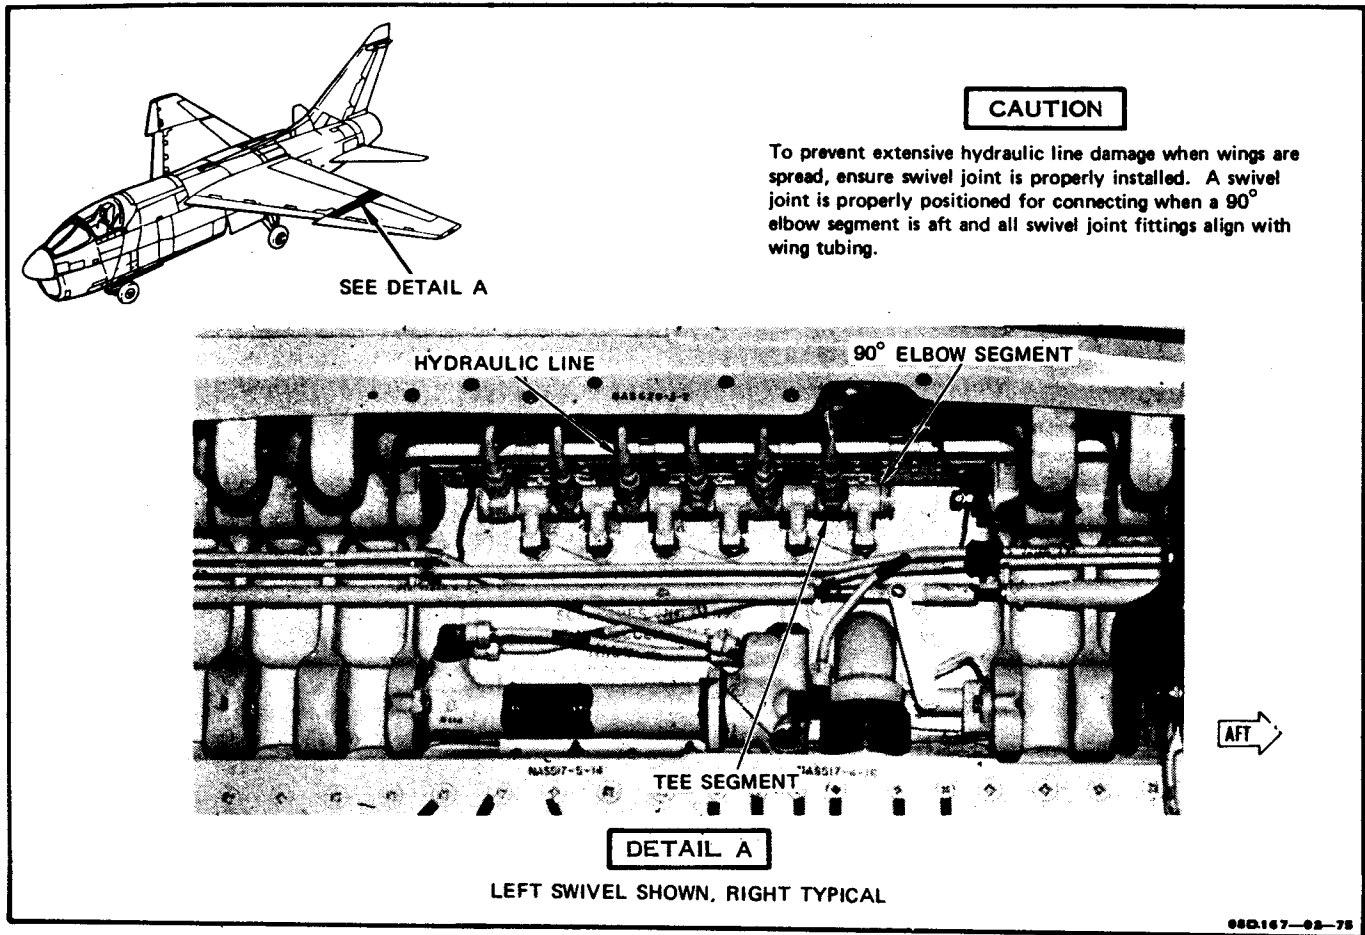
Wingfold Swivel Joint Removal and Installation
